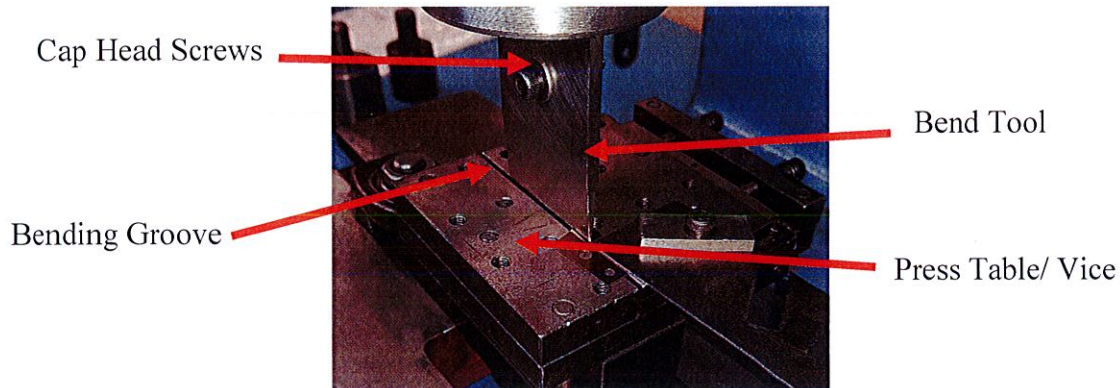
Bend tool fitted and in line with groove in press table/ vice.
